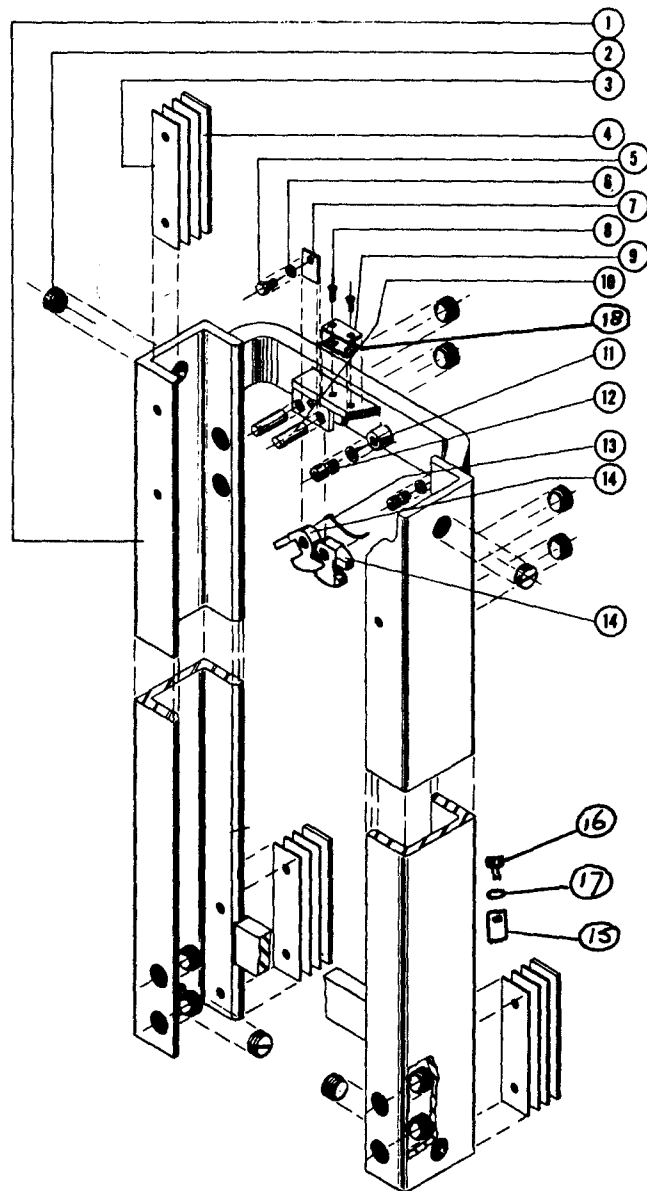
INTERMEDIATE CHANNEL ASSEMBLY
